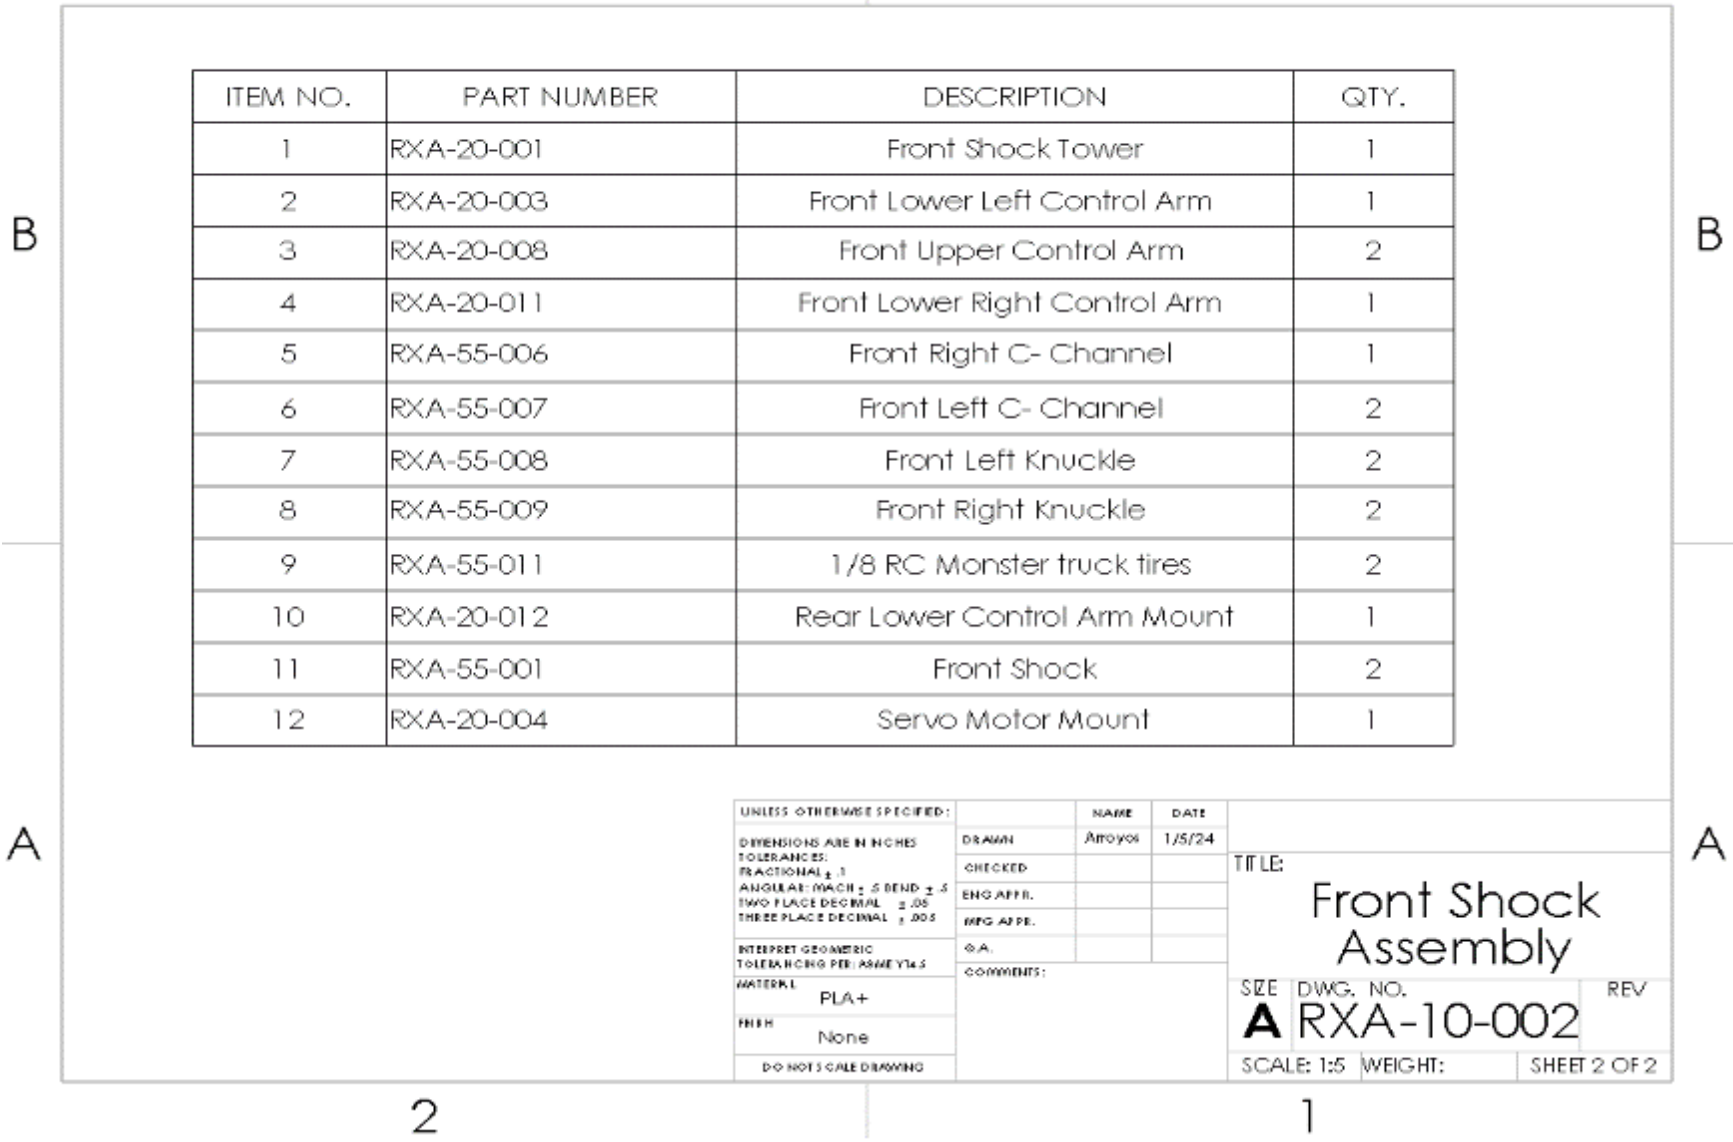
Bill of materials for Front Shock Tower Sub-Assembly
